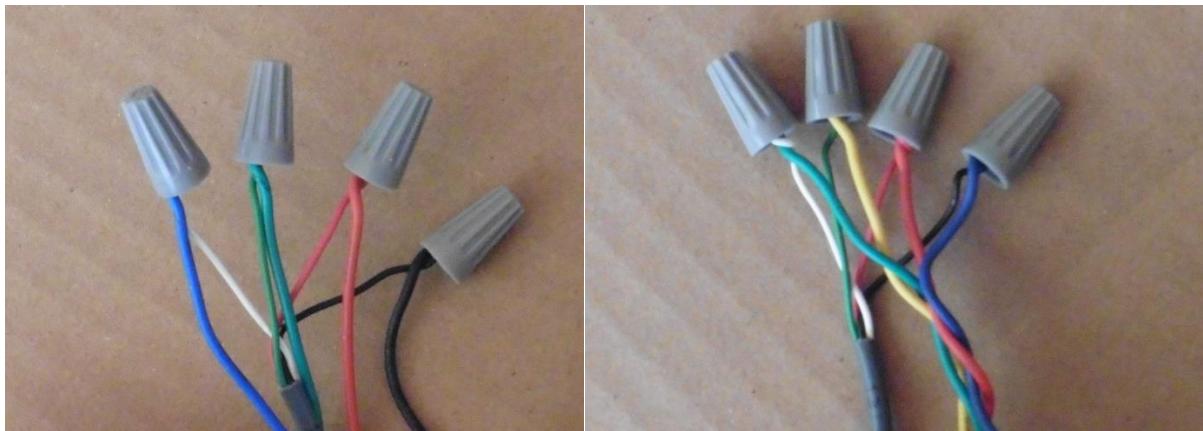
Motor End Cable Connections with 23HX22-2804S or 23HX30-2804S Style Motor (Left) and 57BYGH104 Style Motor (Right)
